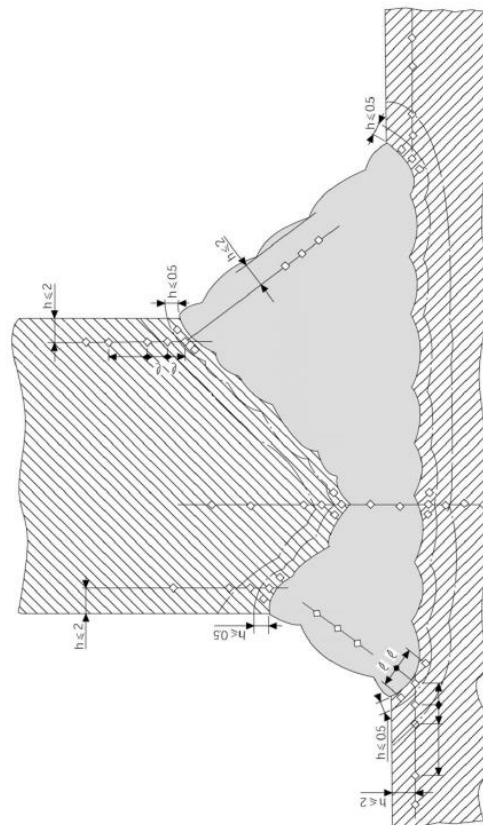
Example showing the position of the indentations for hardness test on the weld metal, the heat affected zone and the base metal of a T-joint weld (dimensions in mm)
